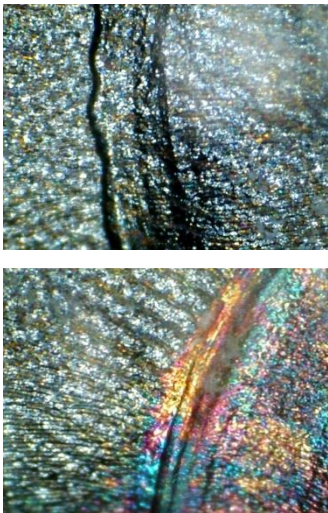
Welding seam laser cleaned at  $f=2$  kHz,  $\tau=100$  ns,  $P=20\%$ , 400X magnification
